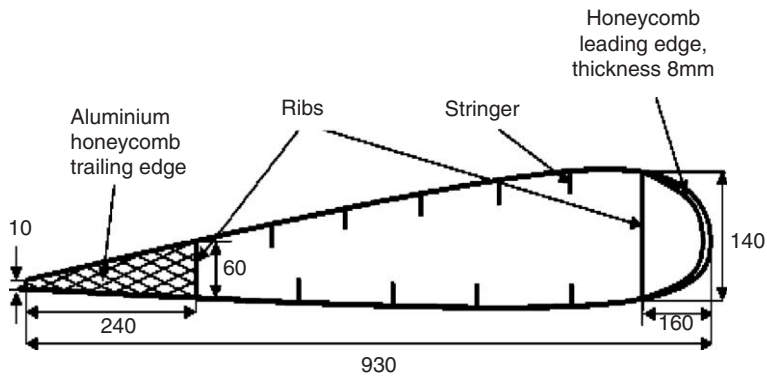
Schematic representation of the wing flap section. Dimensions in mm (not to scale).
